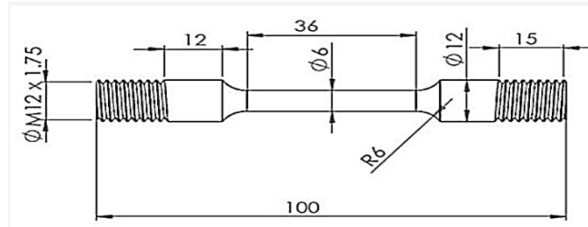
Dimensions of creep specimen, ASTM-E8 [12]
